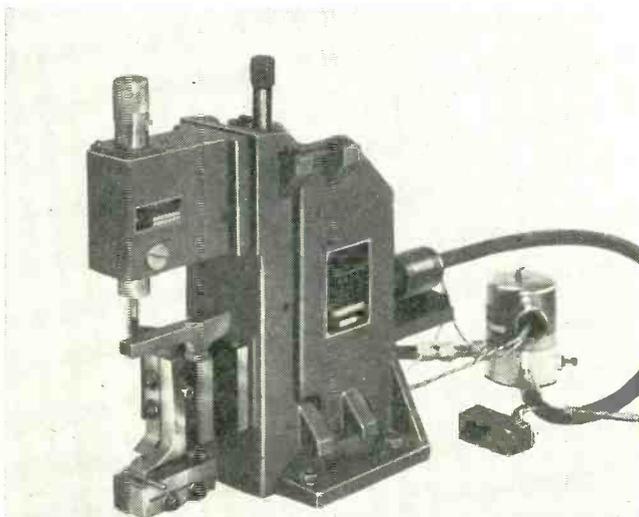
Gage unit used to set grinder controls according to dimensions of bearing jewels being ground
